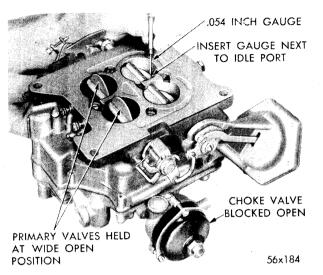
Checking Opening of Secondary Throttle Valves (Step 1)
